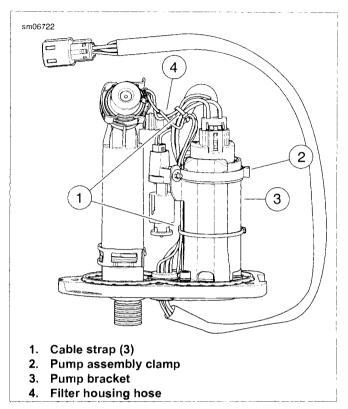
Fuel Pump Cable Straps and Pump Clamp
